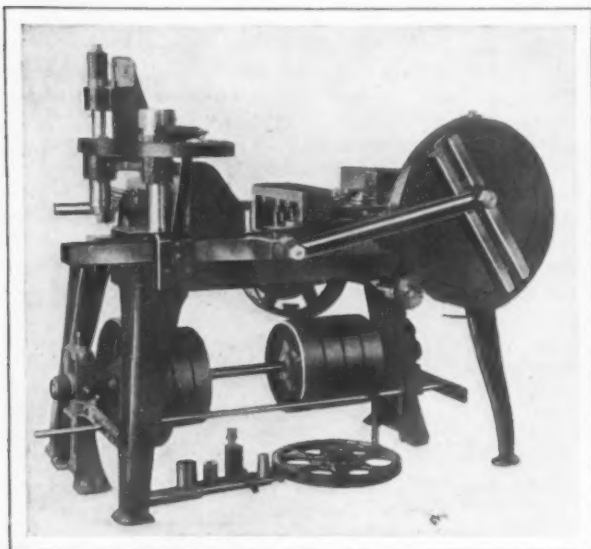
The New Sleeper & Hartley Automatic Torsion Spring Machine
